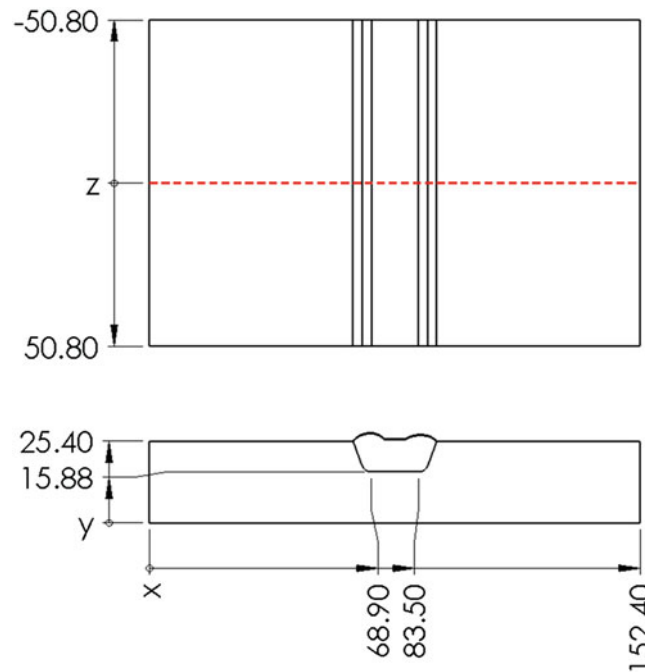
Titanium electron beam welded plate dimensions and measurement location (dimensions in mm)
